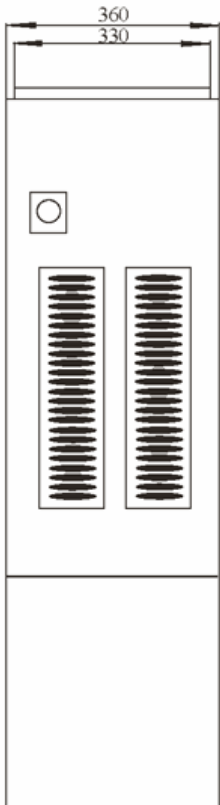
, PRINCIPAL DIMENSIONS (mm)
